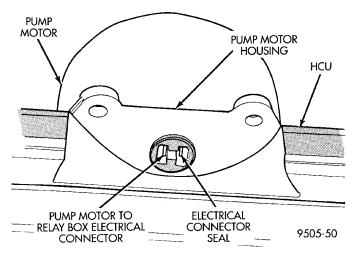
Pump Motor To Relay Box Electrical Connection Seal
